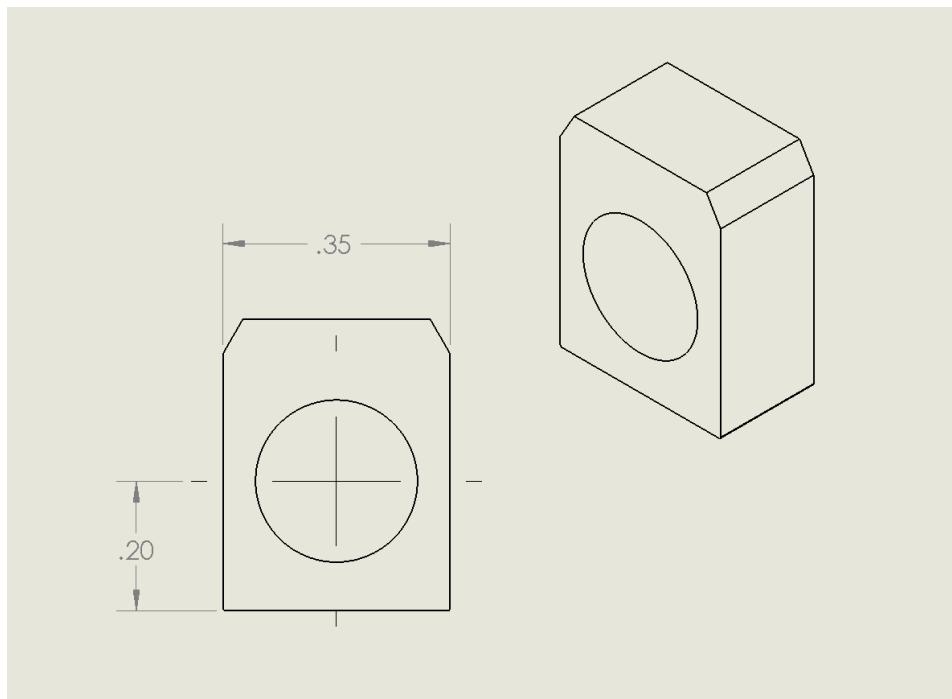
The dimensions of the machined nut are shown in inches (nut.SLDDRW).
